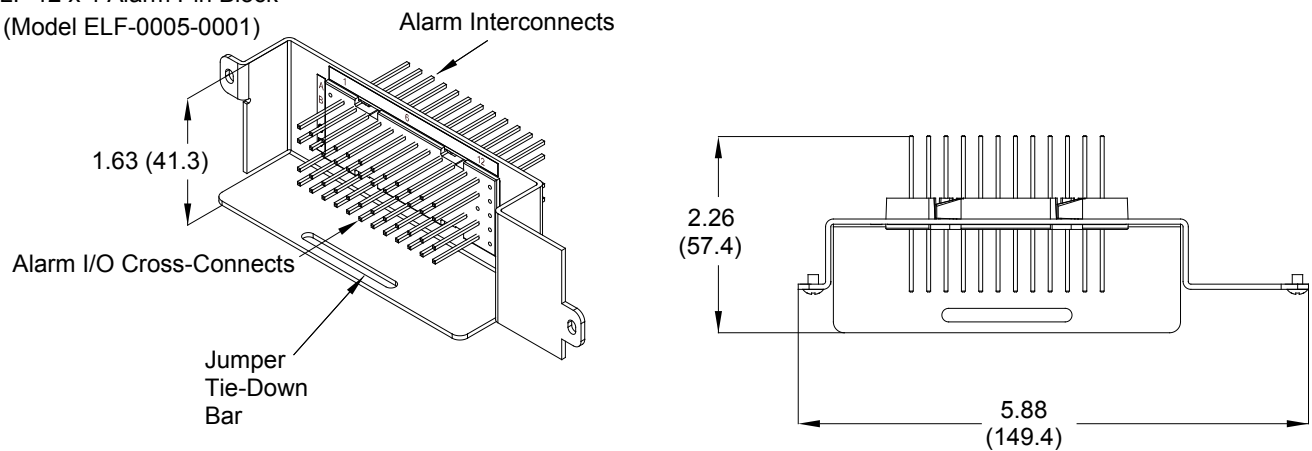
Model ELF-0005-0001 Parts & Dimensions
